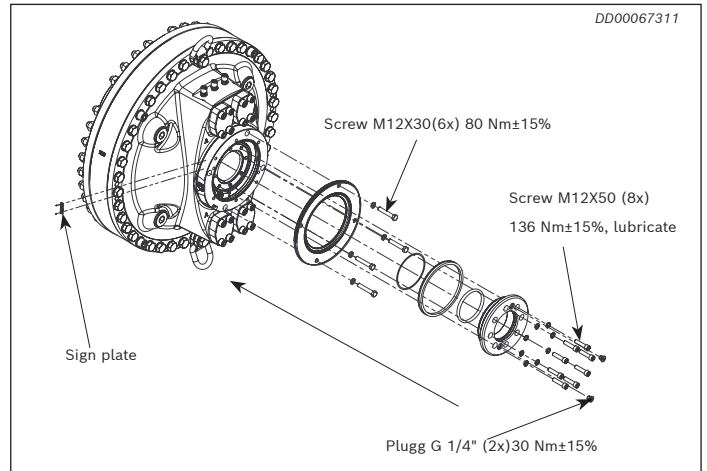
Outer ring, sign plate and SPDC magnetized bearing holder
